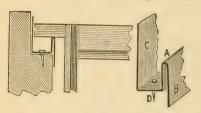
Section of improved tin frame-rest: A, folded edge on which frame rests; B and D, nails. (From Gleanings.)
